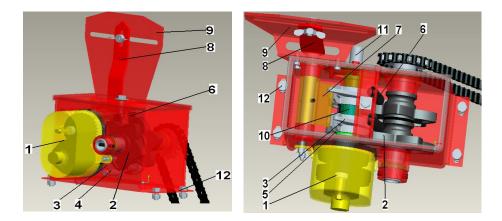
The construction of the cam-rocker mechanism gearbox [2]
